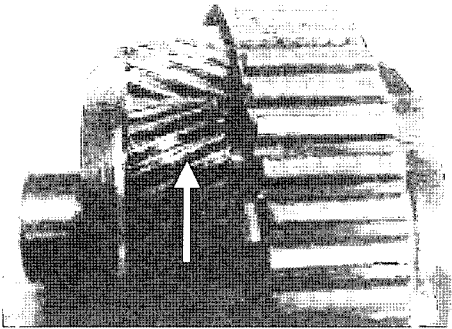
Wear and crack breakage of planetary gear set.
